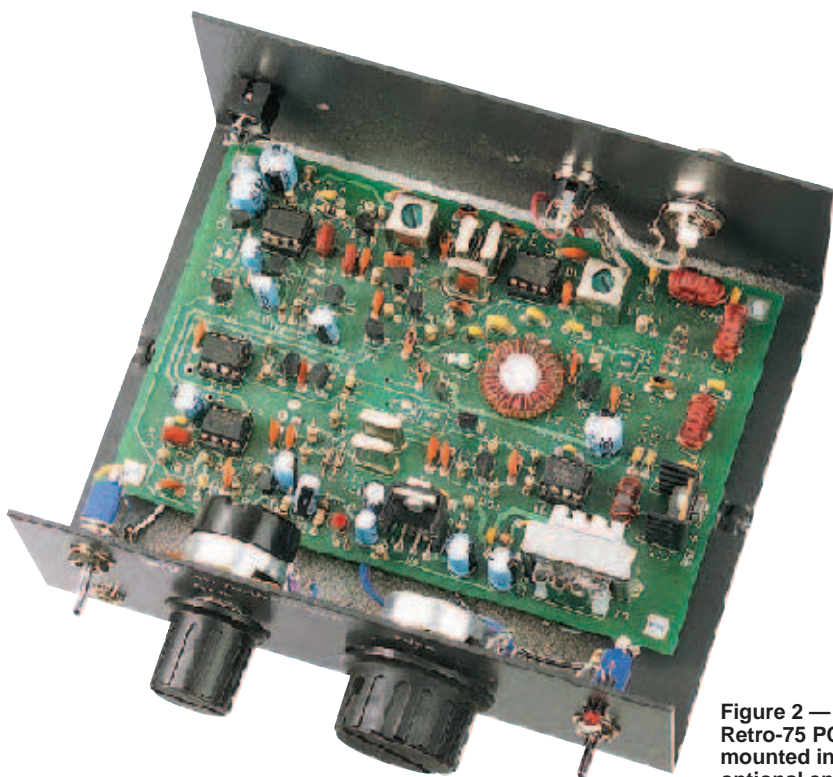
The Retro-75 PC board mounted in the optional enclosure.
